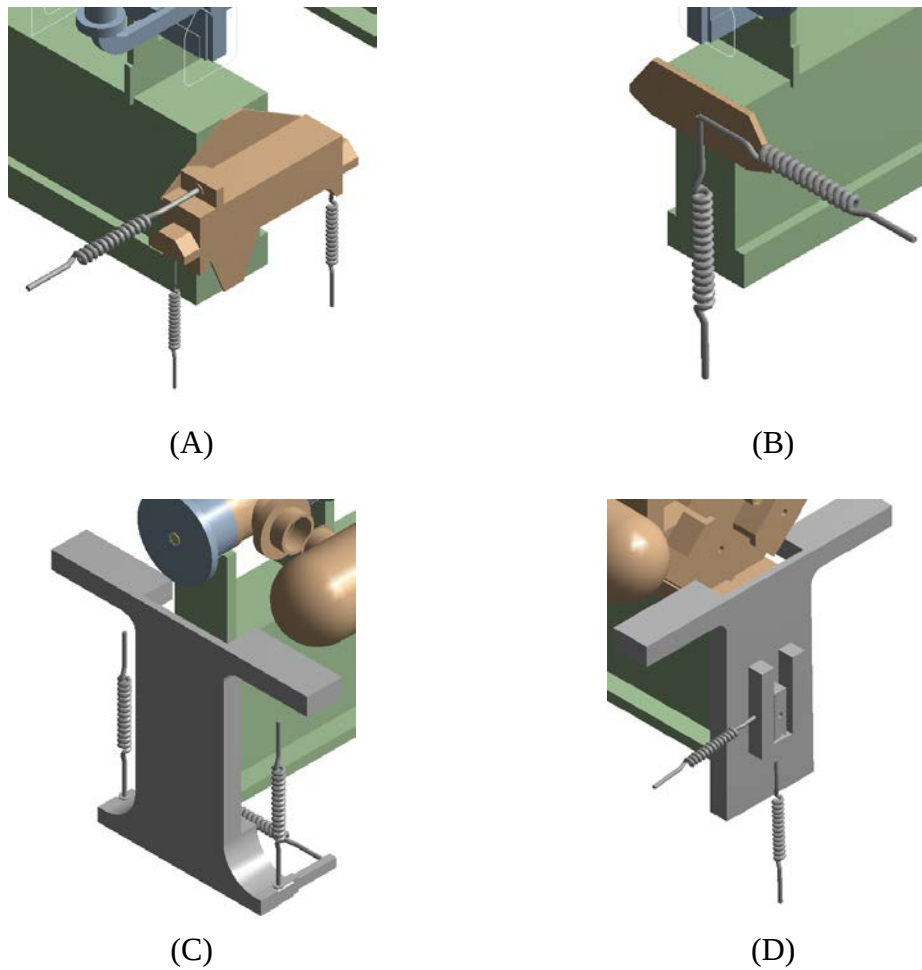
MB master cradle (A), MB slave cradle (B), DB master cradle (C) and DB slave cradle (D) as modelled in ANSYS.
